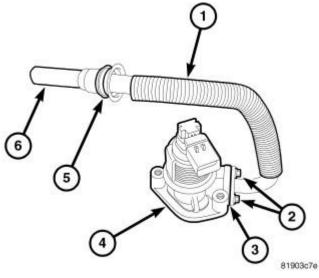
EGR SOLENOID/TUBE ASSEMBLY Courtesy of CHRYSLER LLC
